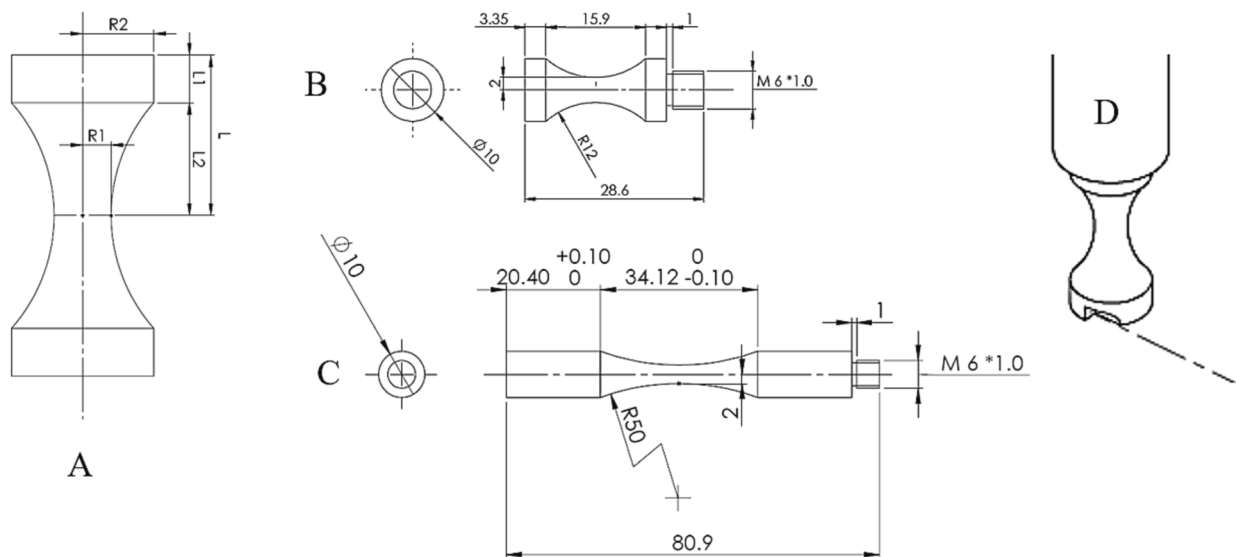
Pure torsion ultrasonic fatigue test specimen and setup: [A] Hourglass key general dimensions; [B] AISI P20 pure torsion specimen dimensions; [C] AISI P20 tension-compression specimen dimensions; [D] Rotational displacement measurement representation. All dimensional units in mm.
